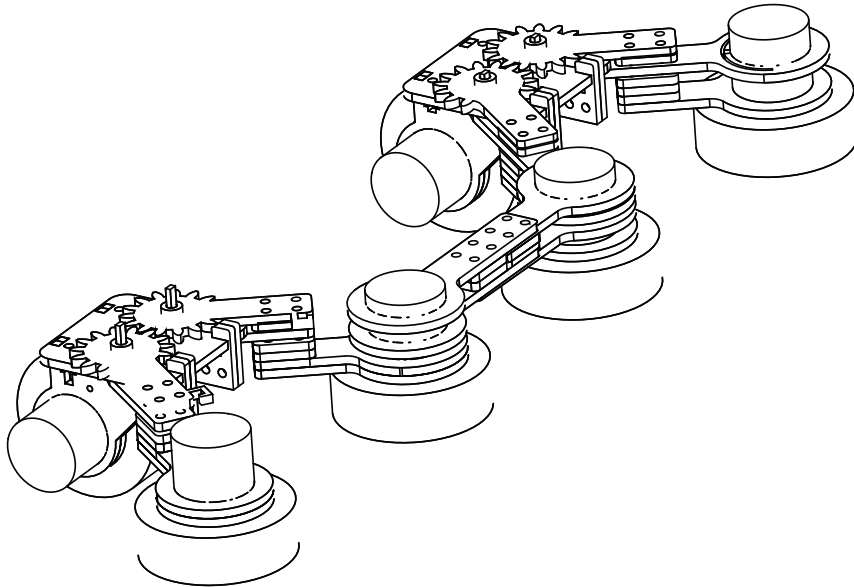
CAD sketch of the proposed robot mechanism
